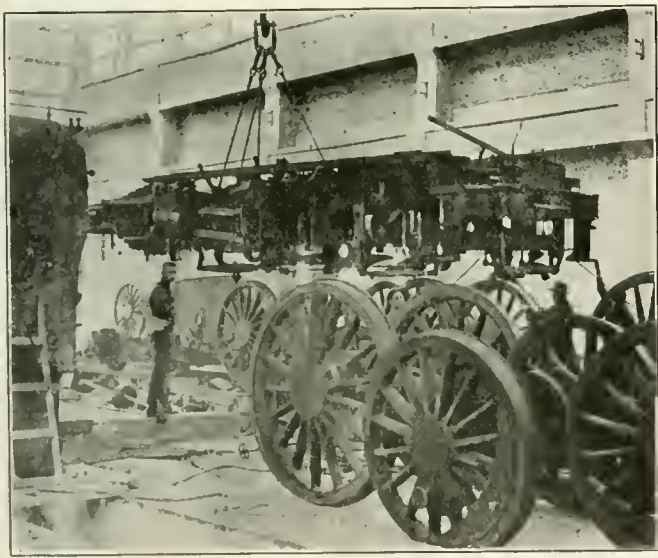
French Locomotive Cylinders and Frames Just After Being Unwheeled
